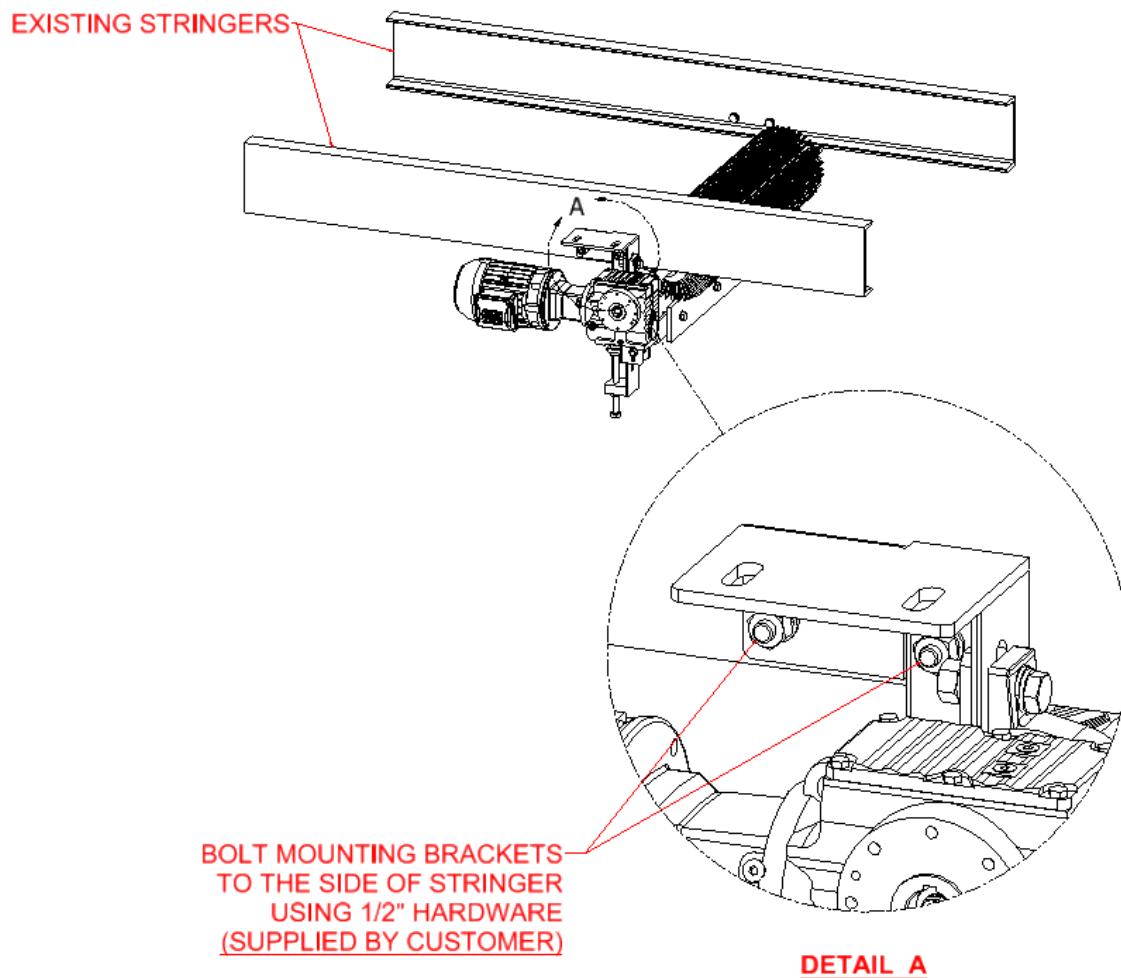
illustrates mounting the brush cleaner to existing stringers using customer supplied 1/2" hardware. This mounting option is most commonly used when mounting the brush cleaner along the length of the conveyor away from the head pulley.
